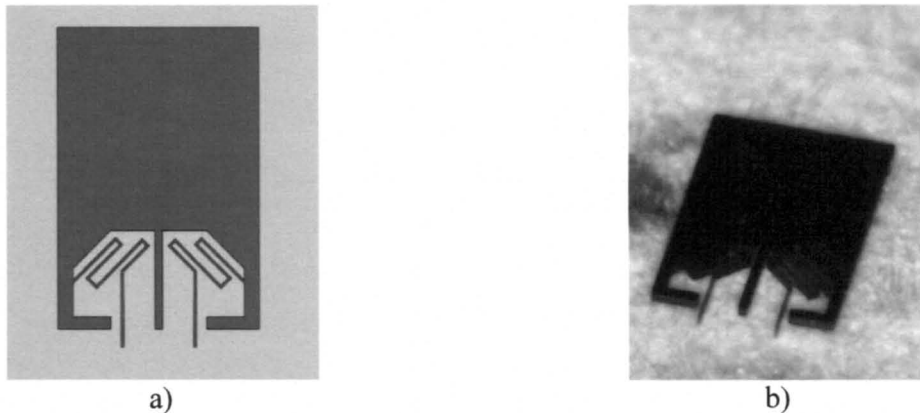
MEMS die holder a) CAD model, b) acquired image
